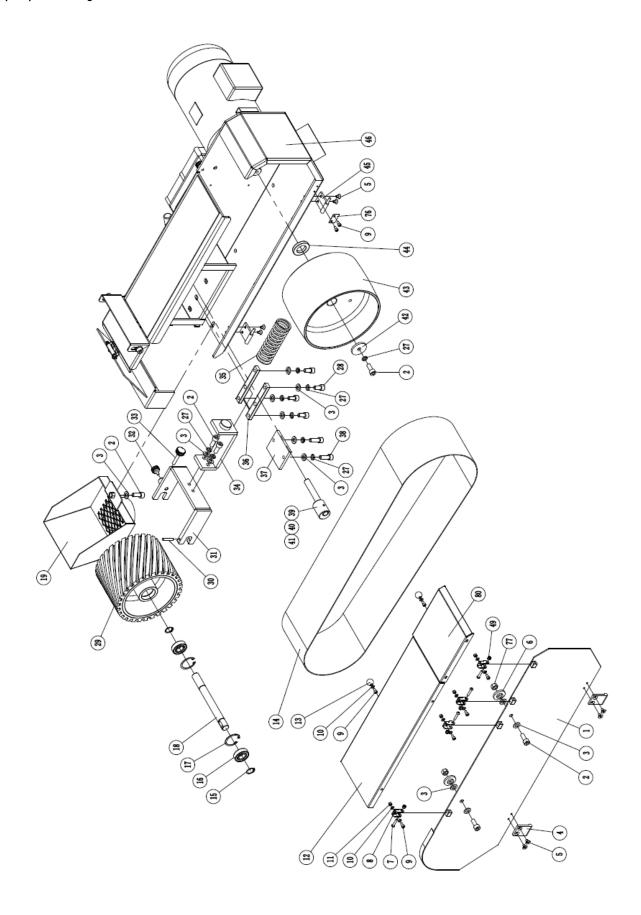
Spare parts drawing 2 MBSM 75-240-1 230 V /400 V, MBSM 75-240-2 400V and MBSM 150-240-2 400V
